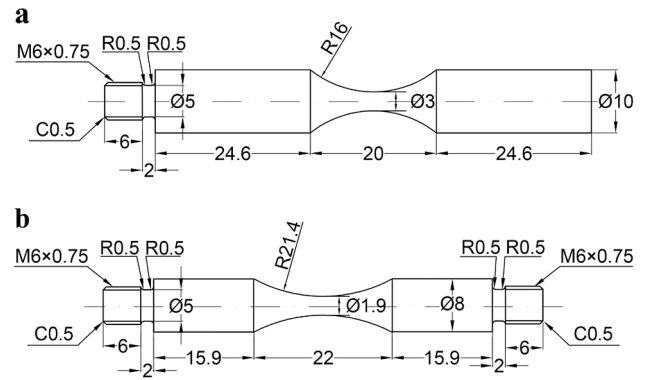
Shape and geometry of specimens for fatigue tests (in mm). (a)  $R = -1$ . (b)  $R = 0.1$  and  $0.2$ .
